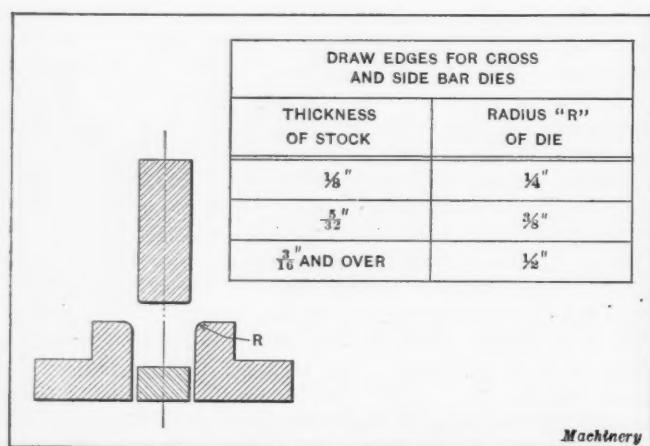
Proper Radius for Drawing Edges of Cross and Side Bars
